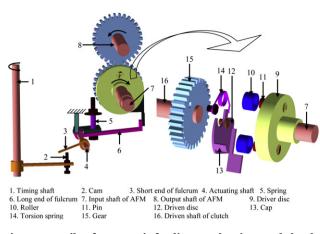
Details of automatic feeding mechanism and clutch provided in the mechanism.
